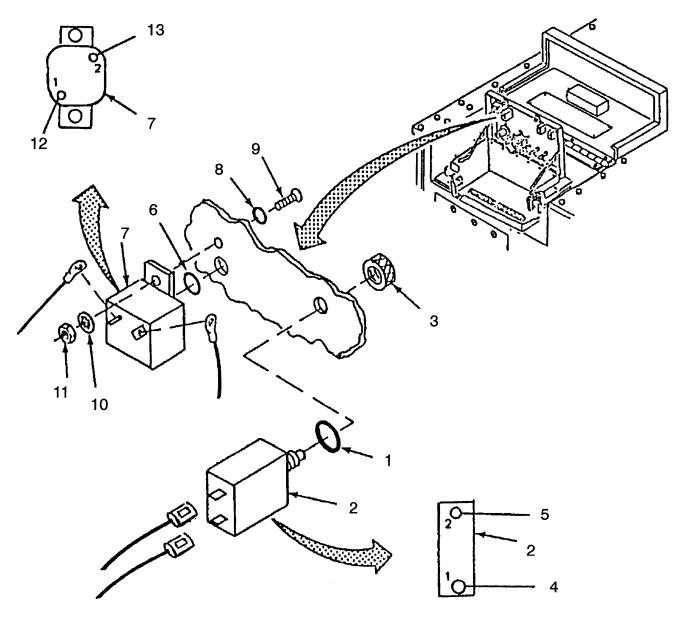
Control Box Assembly, Thermostat and Power Circuit Breakers
